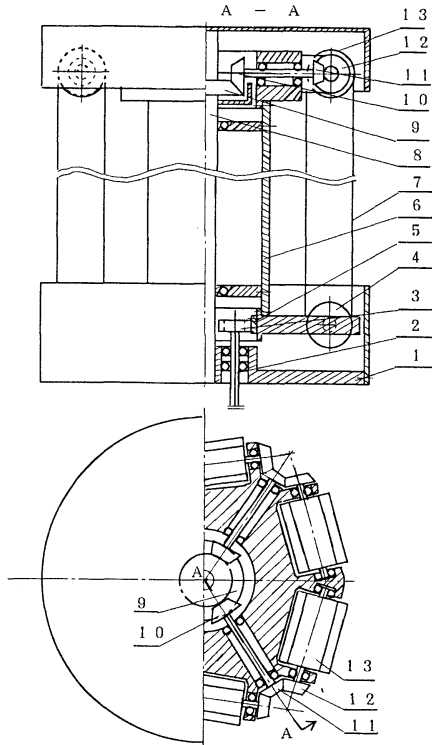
Transmission draft of new mechanism net hauling drum. 1: Baseplate, 2: Driving shaft, 3: Driving gear, 4: Driven belt pulley, 5: Driven gear, 6: Supporting structure, 7: Synchronous belt, 8: Fixed main shaft, 9: Fixed gear, 10, 11, 12: Bevel gear, 13: Driving belt pulley.
